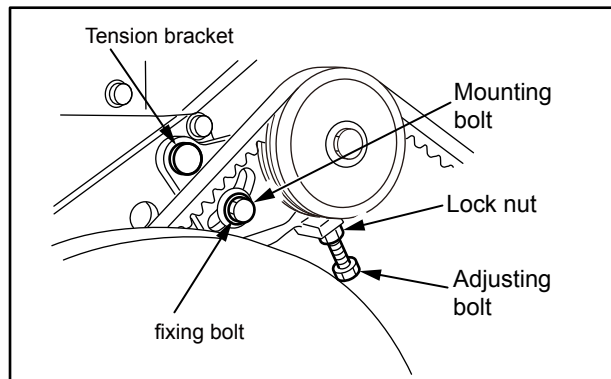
Belt Tension (Fresh-Water Pump Side) - Adjust
